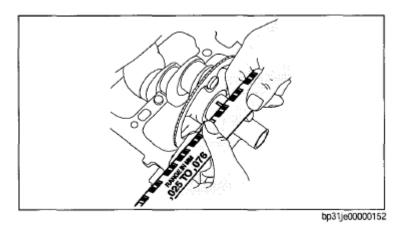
Measuring Main Journal Oil Clearance Using Plastigauge
